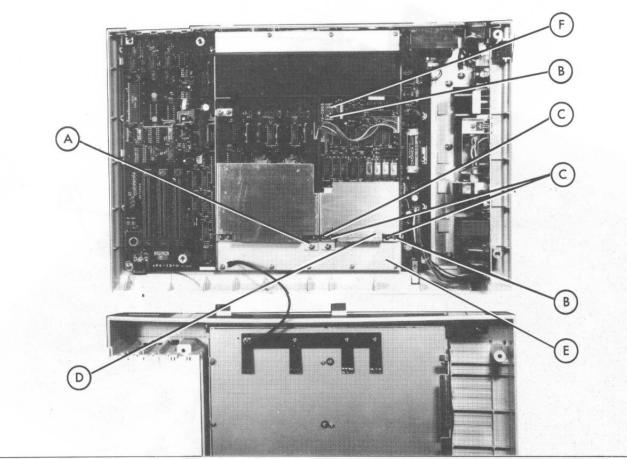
APX-IGGS VIDEO BOARD REMOVAL/REPLACEMENT
